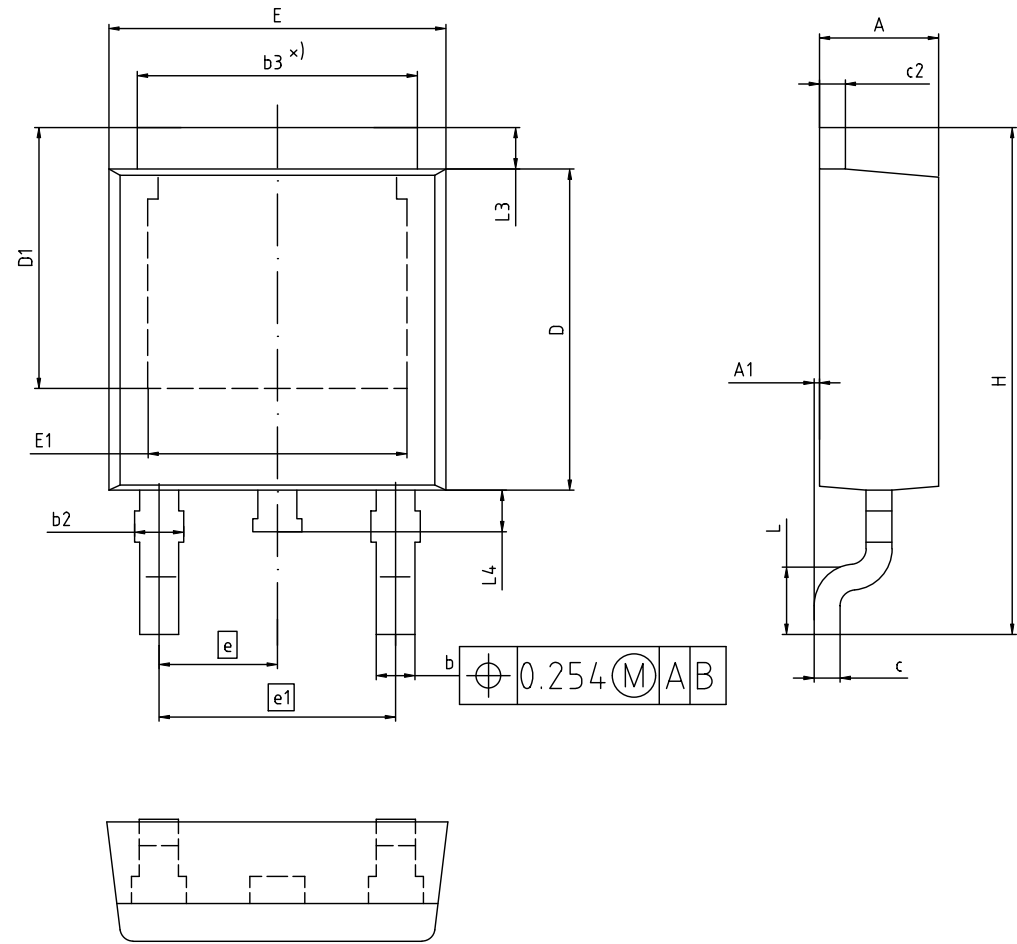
Outline PG-TO263-3, dimensions in mm/inches
